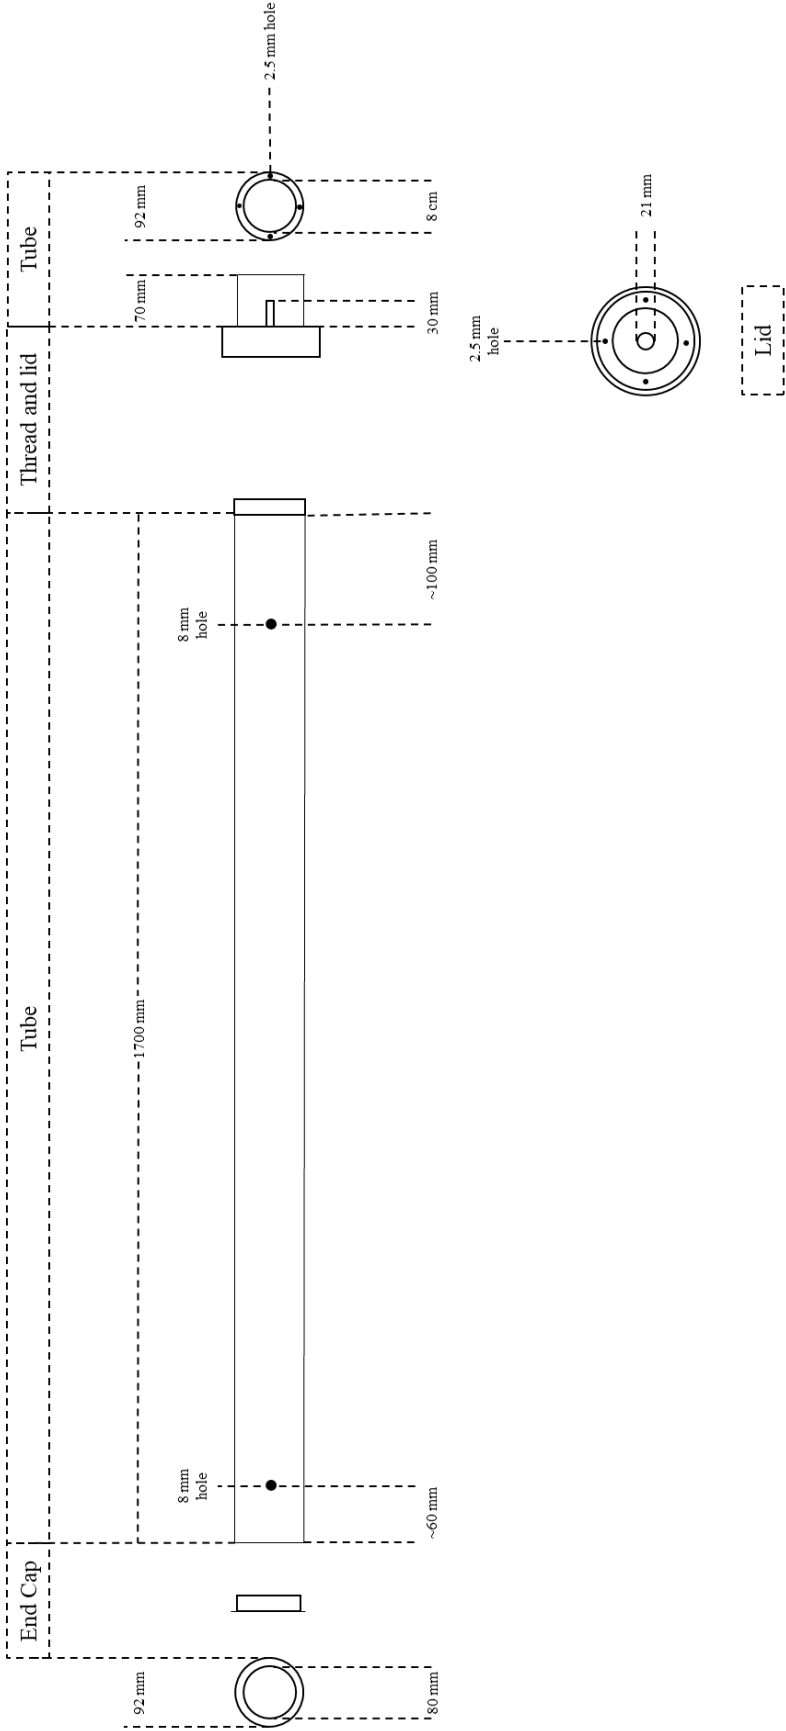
Detail drawing of the stilling tube with the relevant dimensions.
